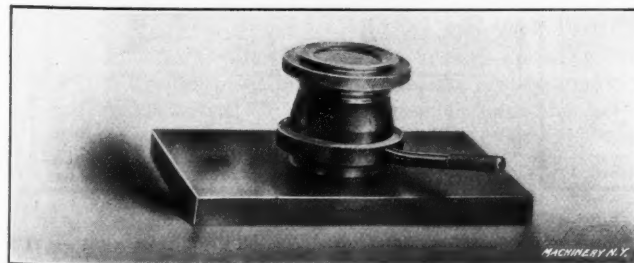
Chuck for Holding Graduated Disk for Engraving
